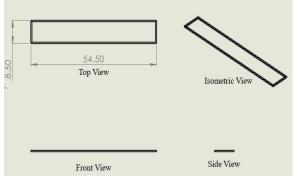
2. (2D and 3D drawing of tank supporting frame)
